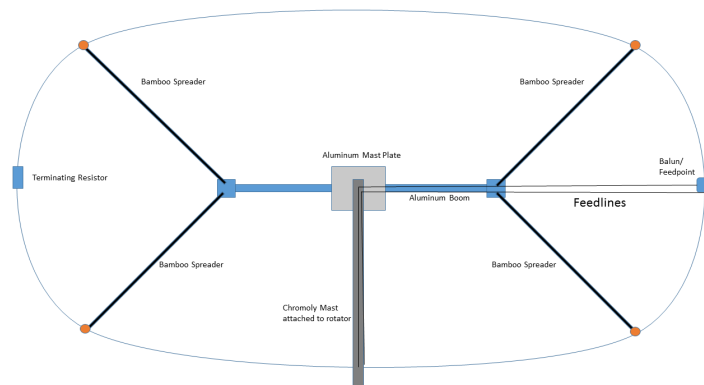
Construction-Fabrication Plan (Antenna shown vertical for details to be seen – final antenna will be twisted horizontal)
